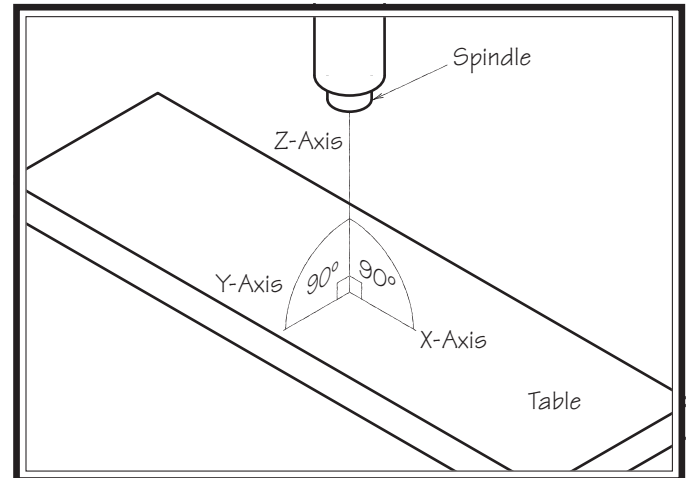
Spindle axis perpendicular to table X- and Y-axes.
